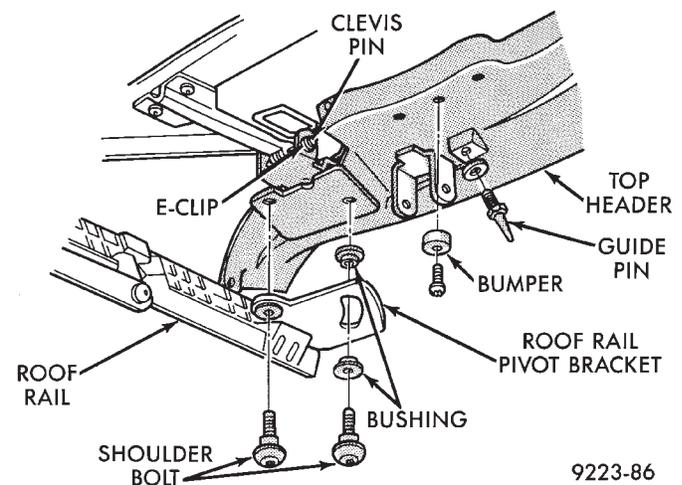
Pivot Link and Roof Rail Pivot Bracket.
